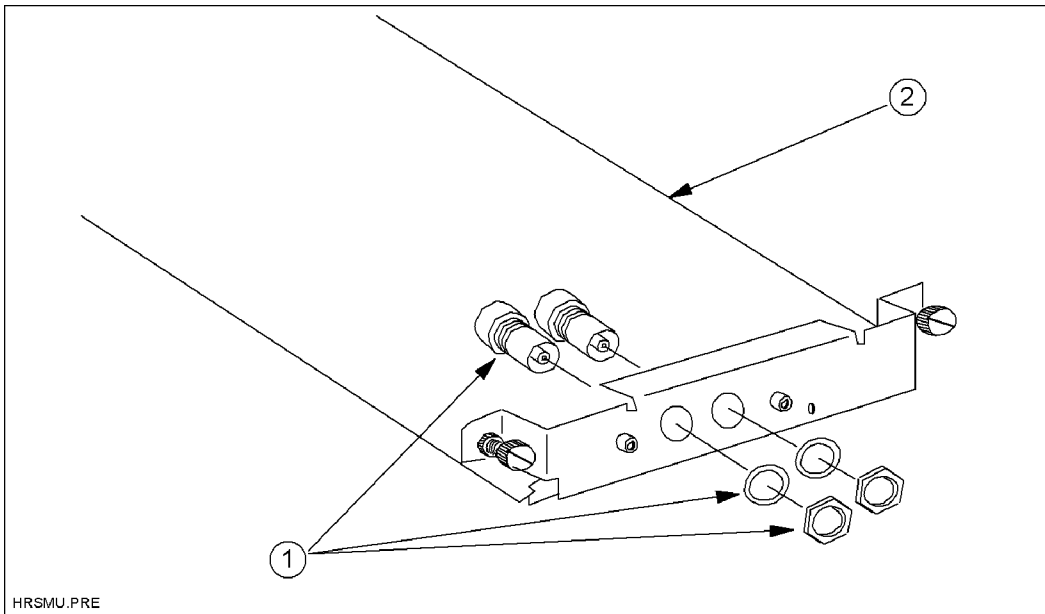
HRSMU Module (04156-66543) Parts Location
